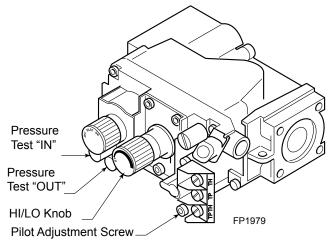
Millivolt Gas Pressure Check at Gas Valve
